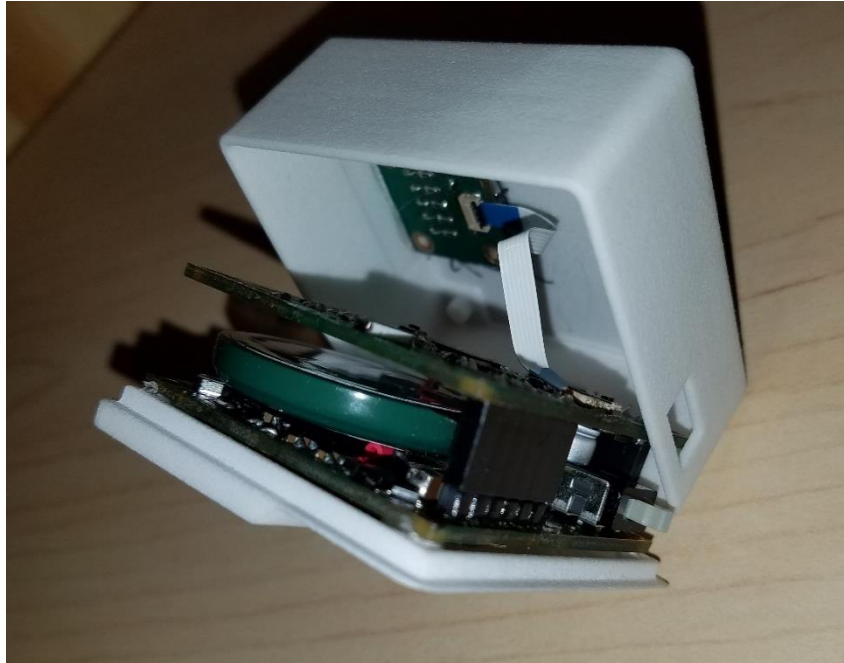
LED Indicator Lights Mounted Inside the Transmitter Top Case Piece
